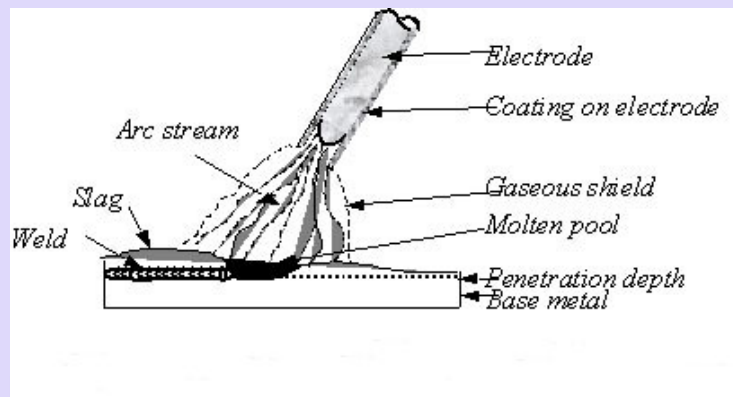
Shielded metal arc welding (SMAW) process
